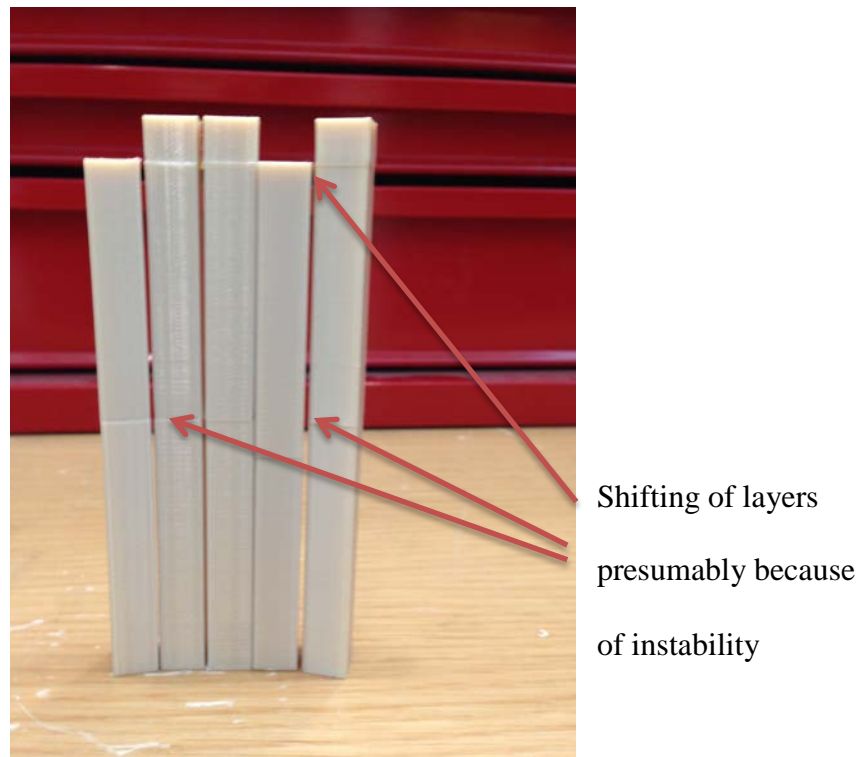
Coupons printed for compression tests showing shifting of alignment at certain layers.
